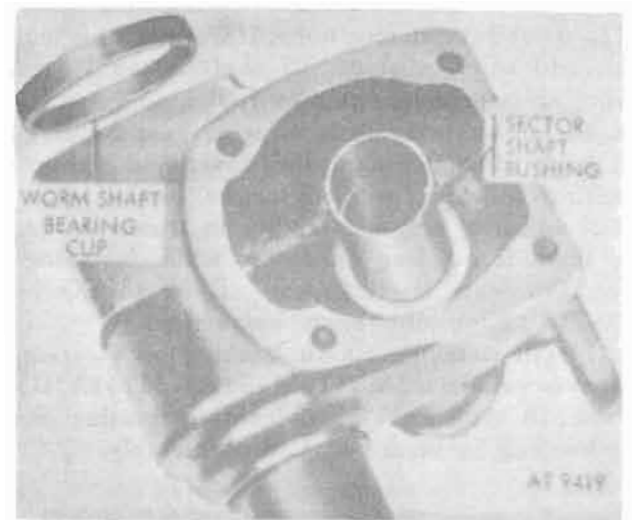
Wormshaft bearing cup and sector shaft bushing.
